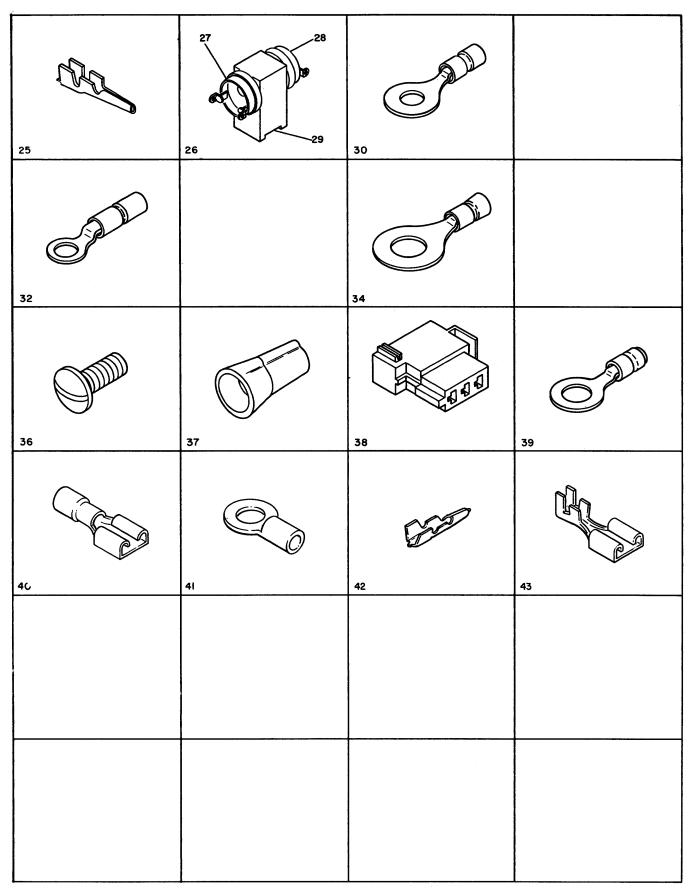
CABLE AND JUMPER ASSEMBLY COMPONENT PARTS. SHEET 2 OF 2. SEE LIST 25.
